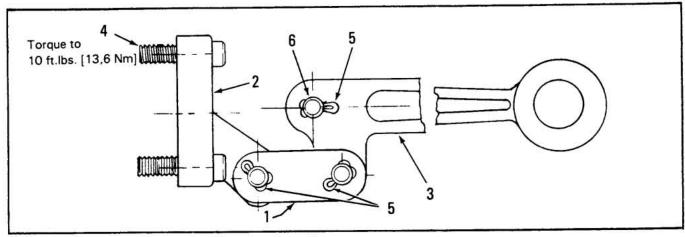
Optional Horizontal Handle and Bracket Assembly.
